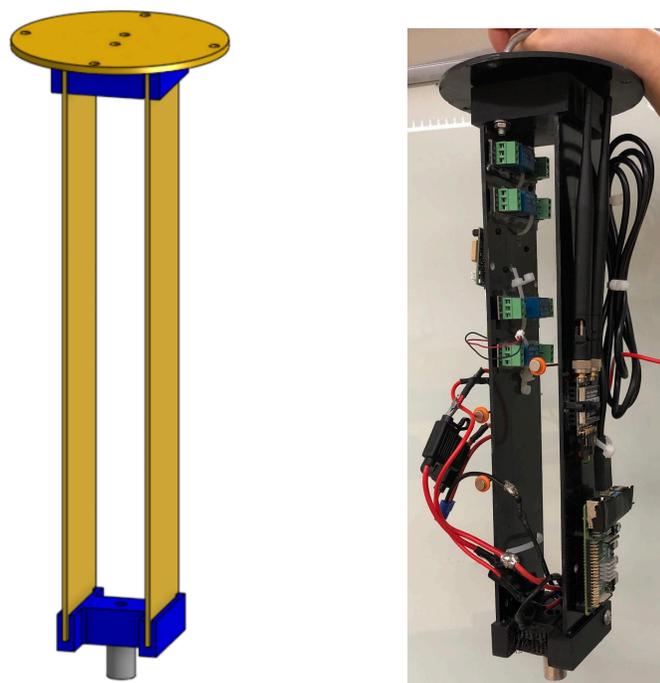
Avionics Bay CAD (Left). Avionics Bay Manufactured (Right)
